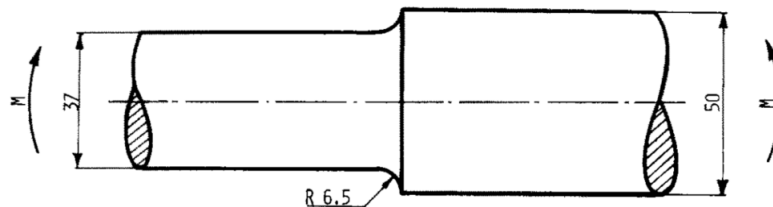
Shoulder fillet geometry investigated by Hjefeldt [34].
